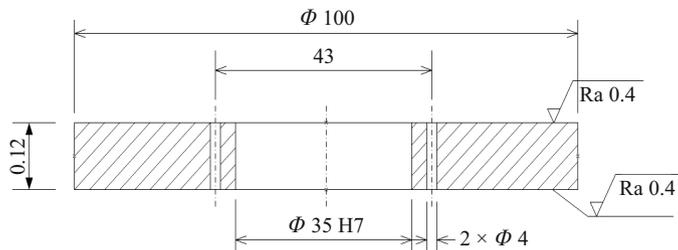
Shape and dimensions of the disk for wear test without greasing
